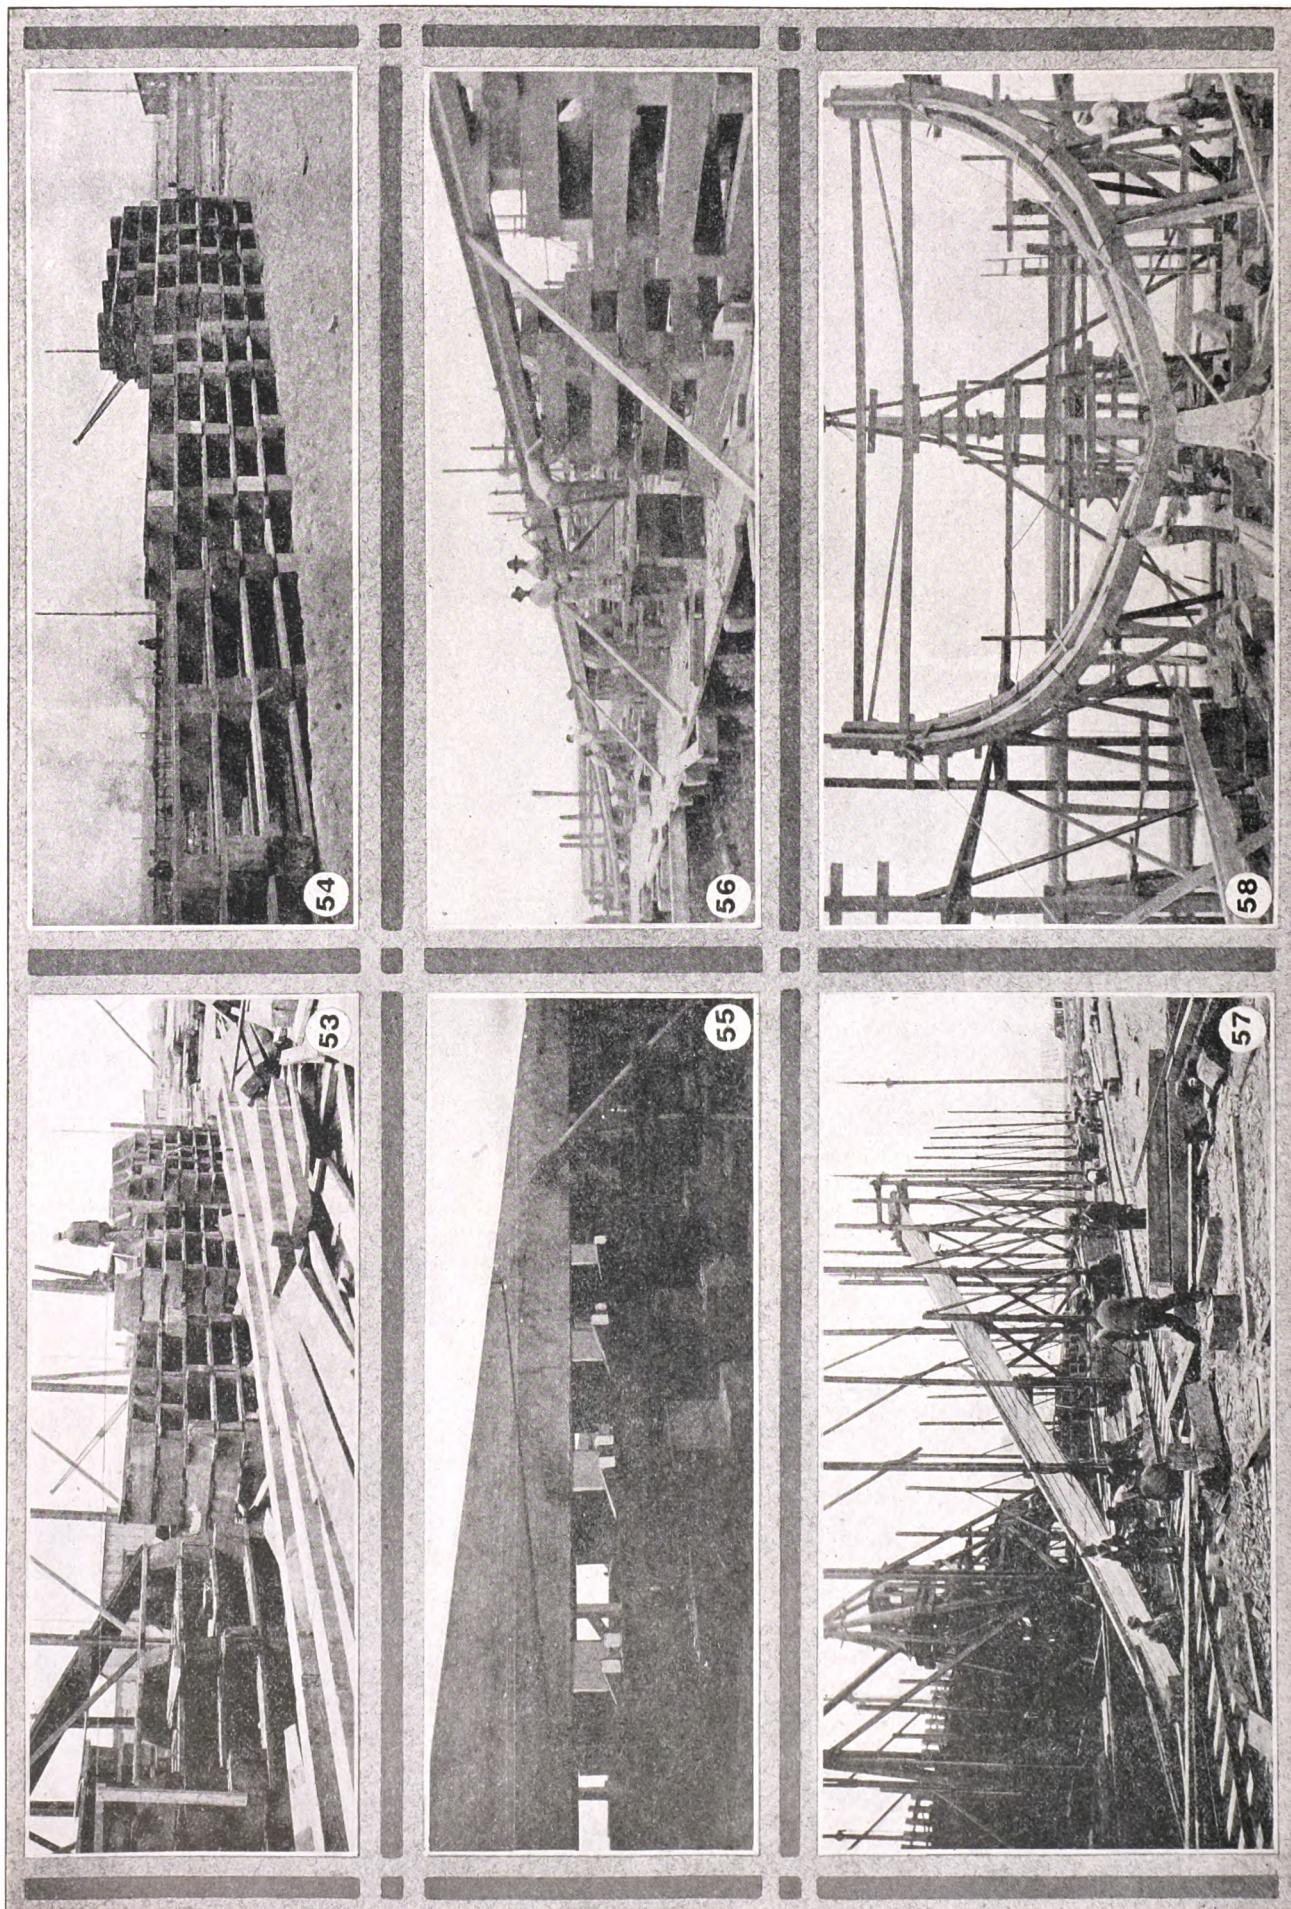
SETTING KEEL BLOCKS TO THE PROPER HEIGHT FIG. 54—SETTING KEEL BLOCKS ON SAND FIG. 55—KEEL
